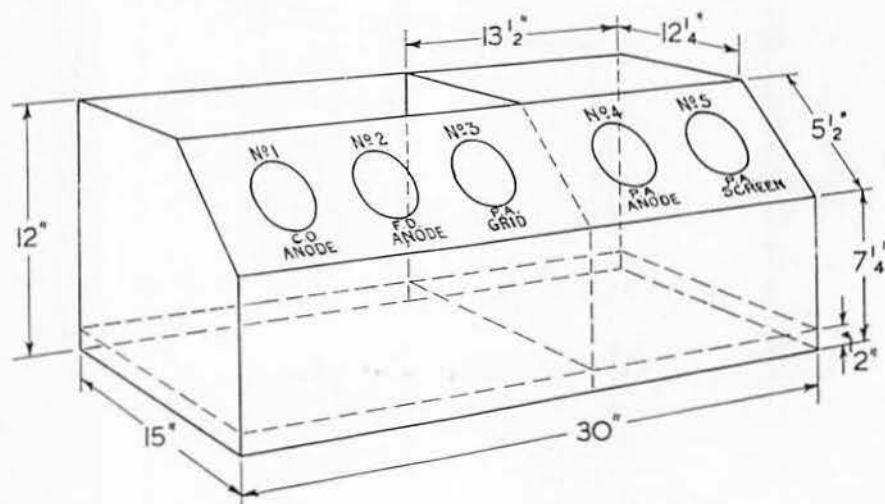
Sketch of the Transmitting Cabinet shown without protecting lid.
